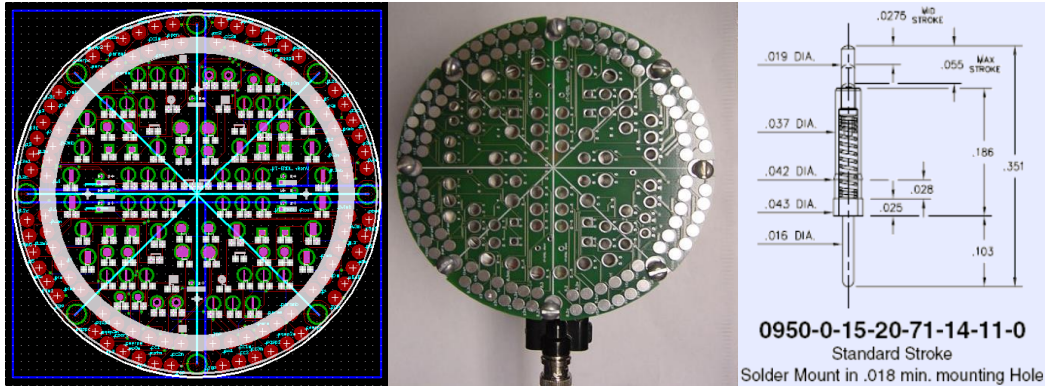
Electrical test setup: (clockwise from top left) PCB layout design, as manufactured, with pogo pins soldered on and finally clamped over a device wafer
